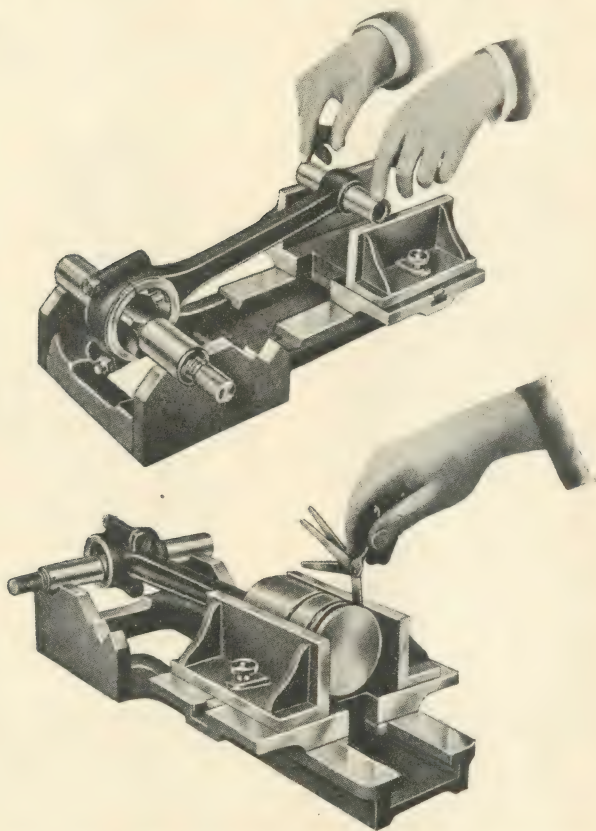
THE B. AND T. CONNECTING ROD ALINEMENT TESTING JIG
